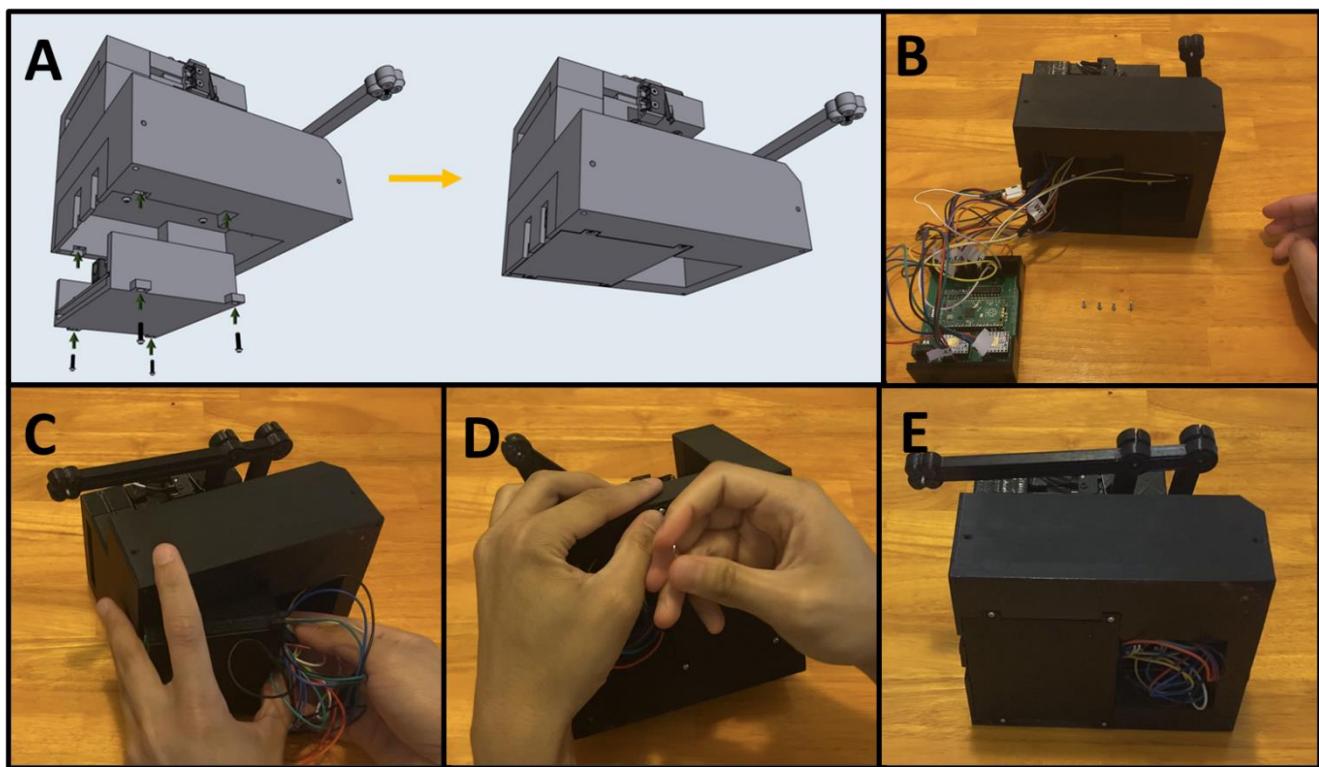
e: The procedure for mounting the PCB tray to the Base.
